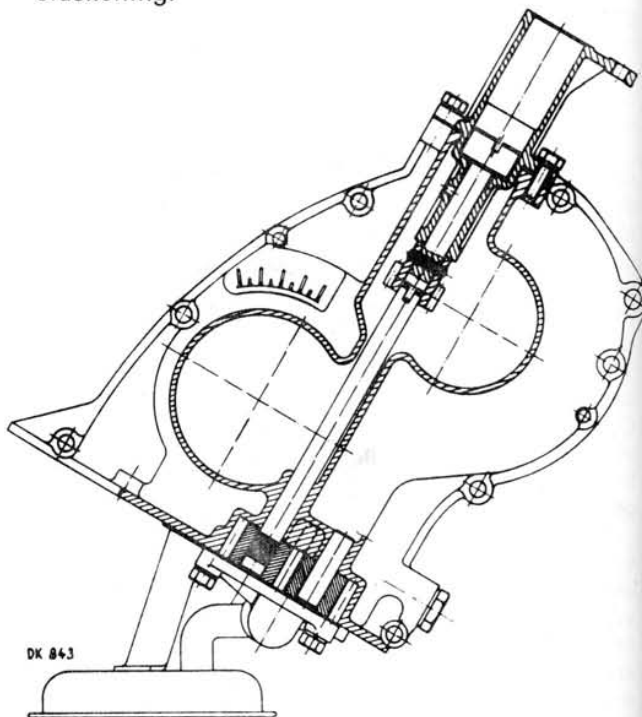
/1 - Timing Gear Cover Assembly - Sectional View
